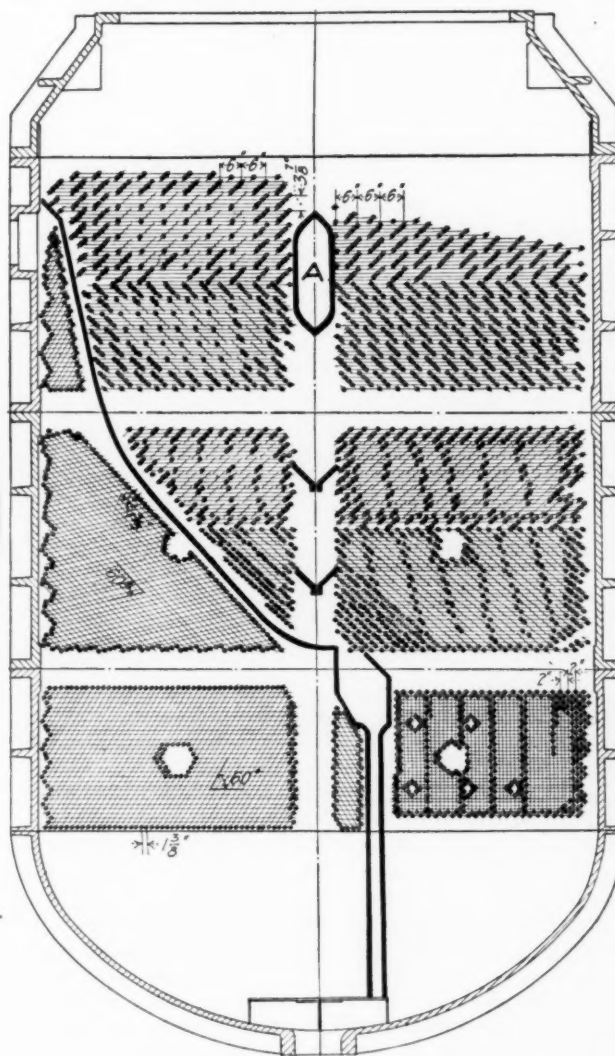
CONDENSER NO. 2, PLANT C. TUBE-SHEET LAYOUT SHOWING STEAM LANES AND DRAIN PLATES
